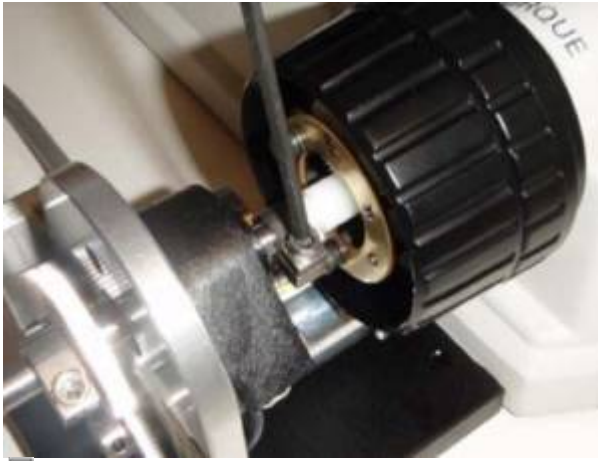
Installing the tab in the slot & tightening the drive shaft clamp
